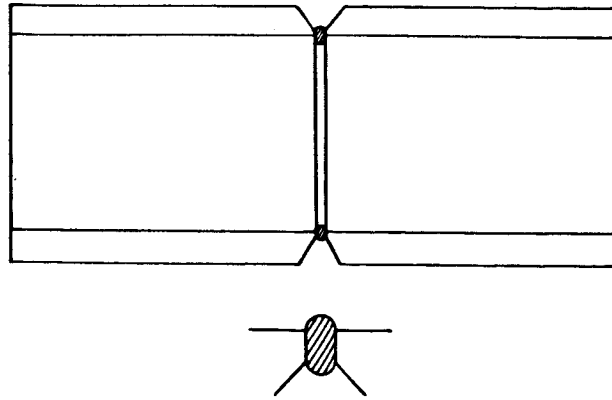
CONSUMABLE INSERT FOR WELDING
